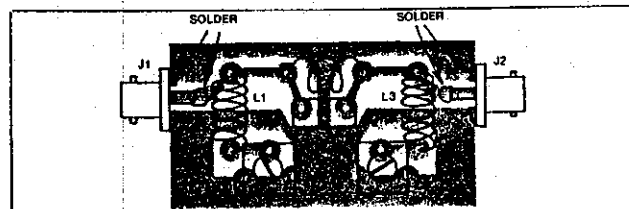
Parts-placement guide for the filter. The shaded area represents an X-ray view of the copper pattern. The two BNC connectors are each soldered to the board in three places as shown.
